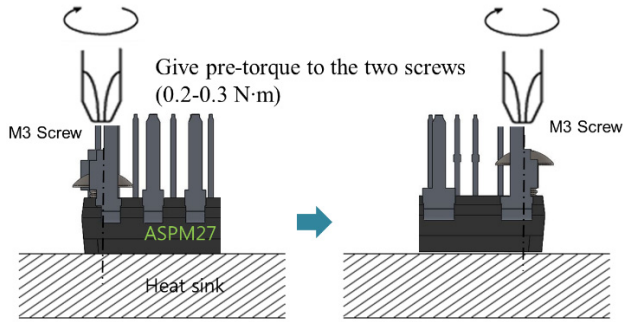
Illustration of Screw Clamping with Heat Sink (Method 1)
